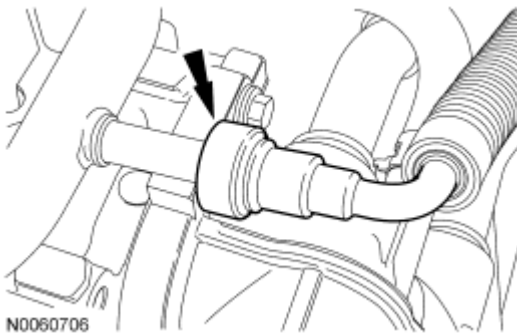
Identifying Fuel Supply Tube From Fuel Rail
